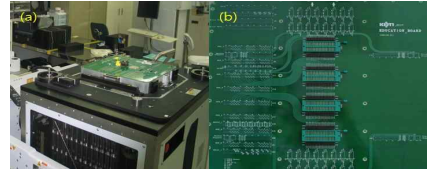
(a) Electrical Test Equipment and (b) Test Socket in Board for Electrical Measurement
